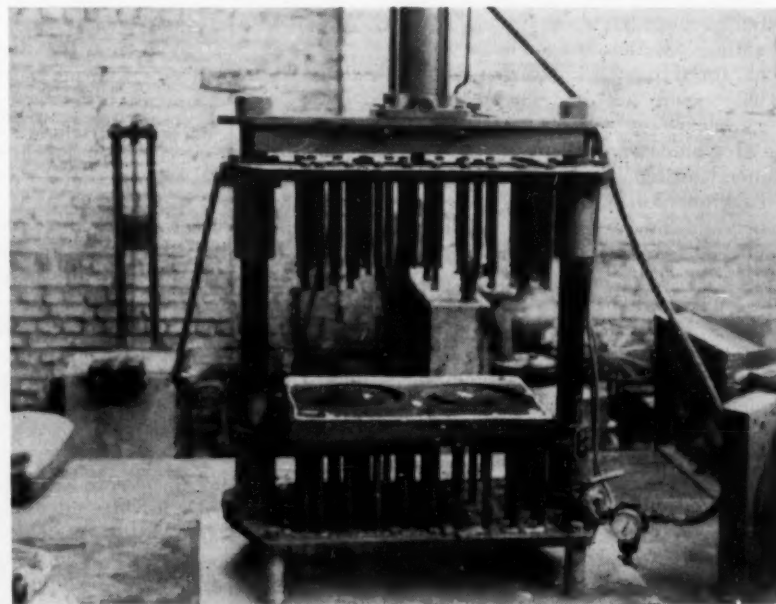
Pin-type shell fuser is best for deep draw molds.
